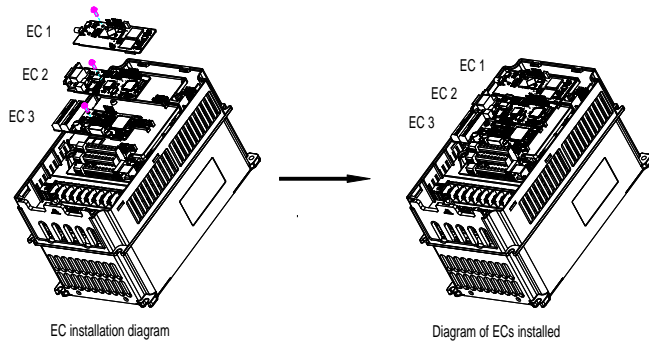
VFD of 7.5 kW or higher with expansion cards installed
